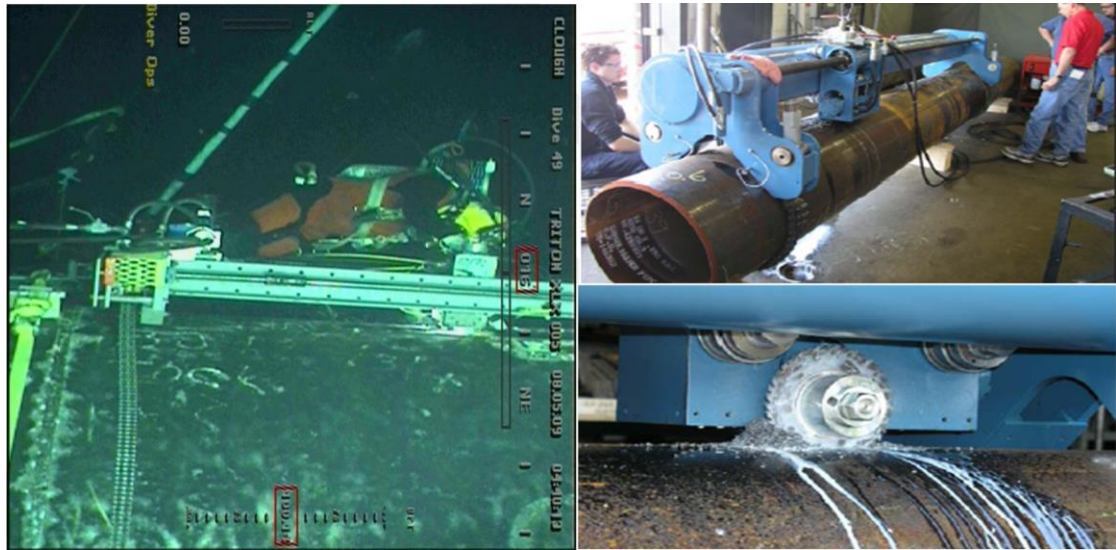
Rail Mill Used to Cut Off Outer Tubulars and Gain Access to Desired Inner Strings
